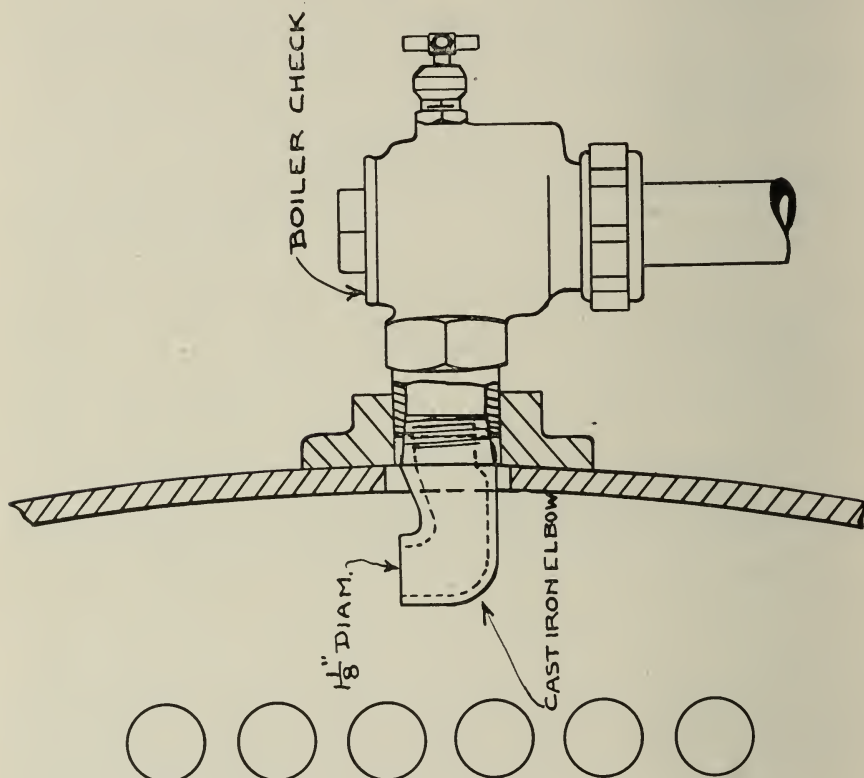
Upturned Elbow Extension for 2 inch Boiler Check
